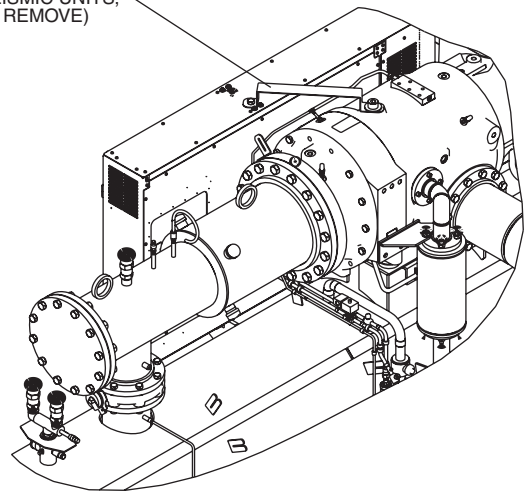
VFD Shipping Bracket (Unit with R Compressor Shown)
